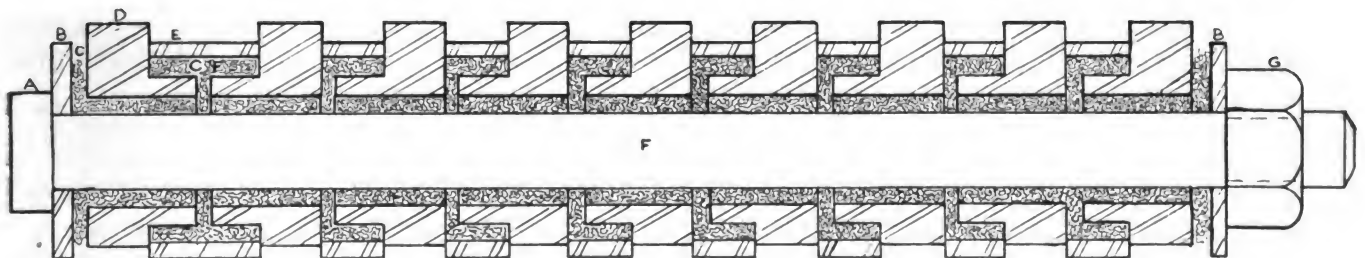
SECTIONAL VIEW OF CAMS ARRANGED ON BOLT READY FOR HEATING
